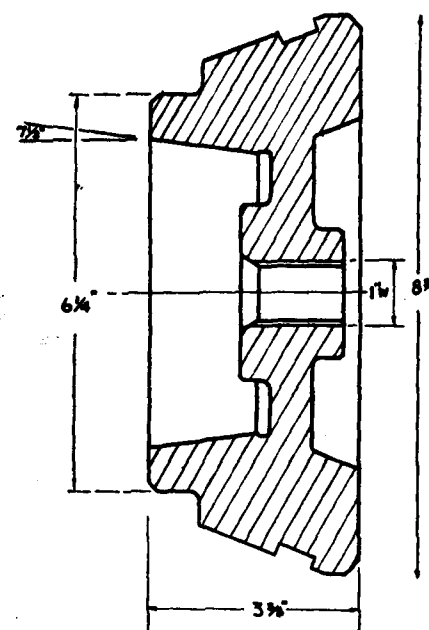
Milling cutter body completely machined in the tool room on a Herbert No. 9B Combination Turret Lathe. A batch of three was required.
